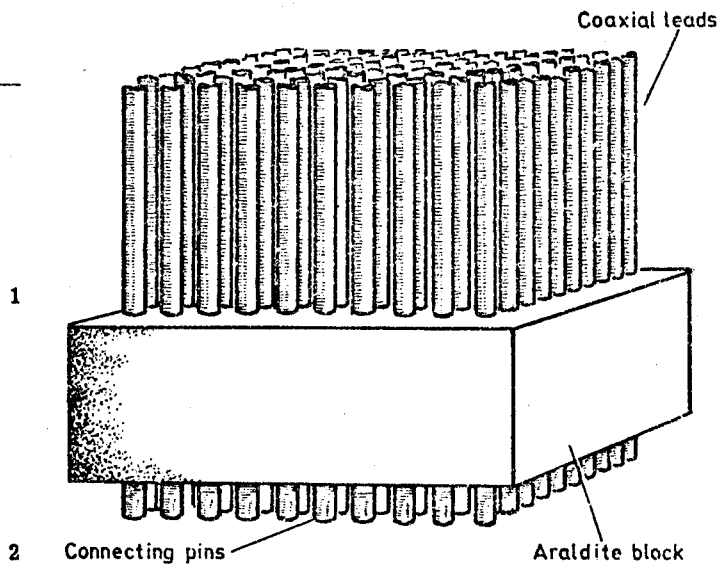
Electrical connections to transducer elements are made using 100 compression spring arrangements
